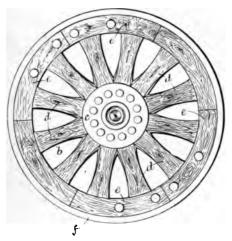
Thornycroft steam omnibus. Side elevation of wheel.
